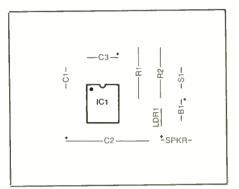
Wiring guide for pc board. Use this as a rough guide to component layout when assembling project on perforated board.
